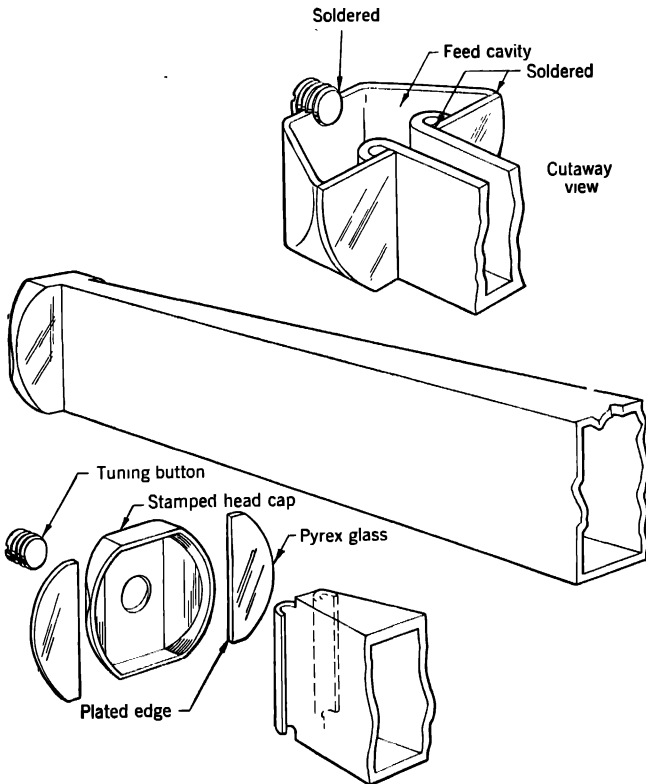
Modified Cutler feed. (Courtesy of Dalmo Victor, Inc.)
